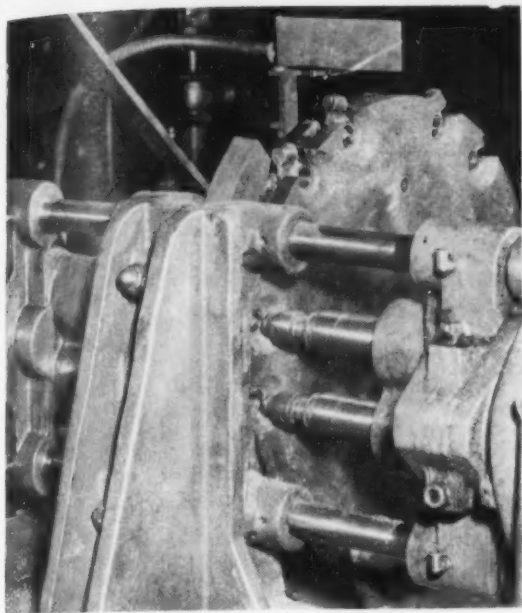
In this Hartford machine, rockers are set in recesses in indexing disk fixture which positions them for automatic chamfering each end of the boss hole.
